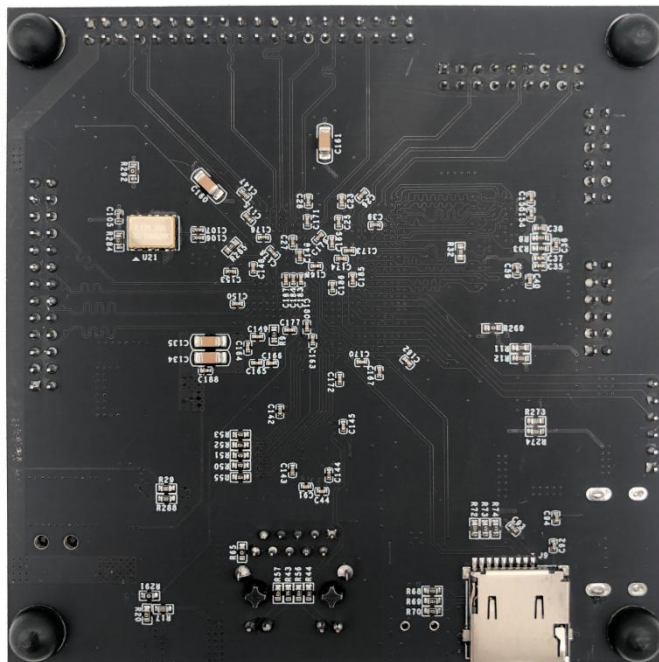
QMTECH XC7A200T Wukong Board Bottom View
